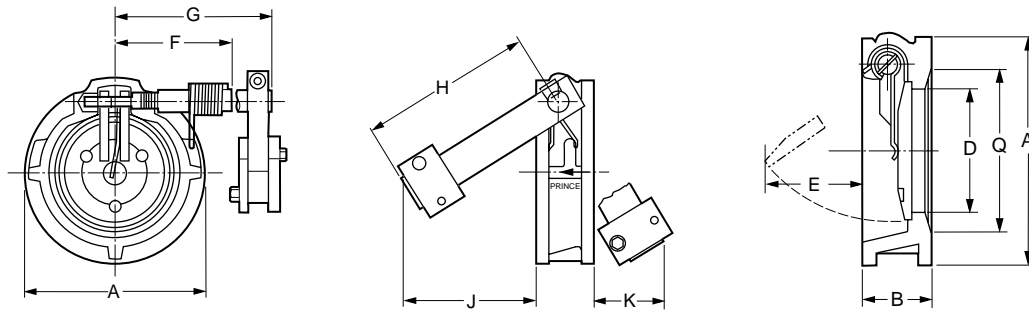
Valve Dimensions (Inches) Sizes 2-12 inch
